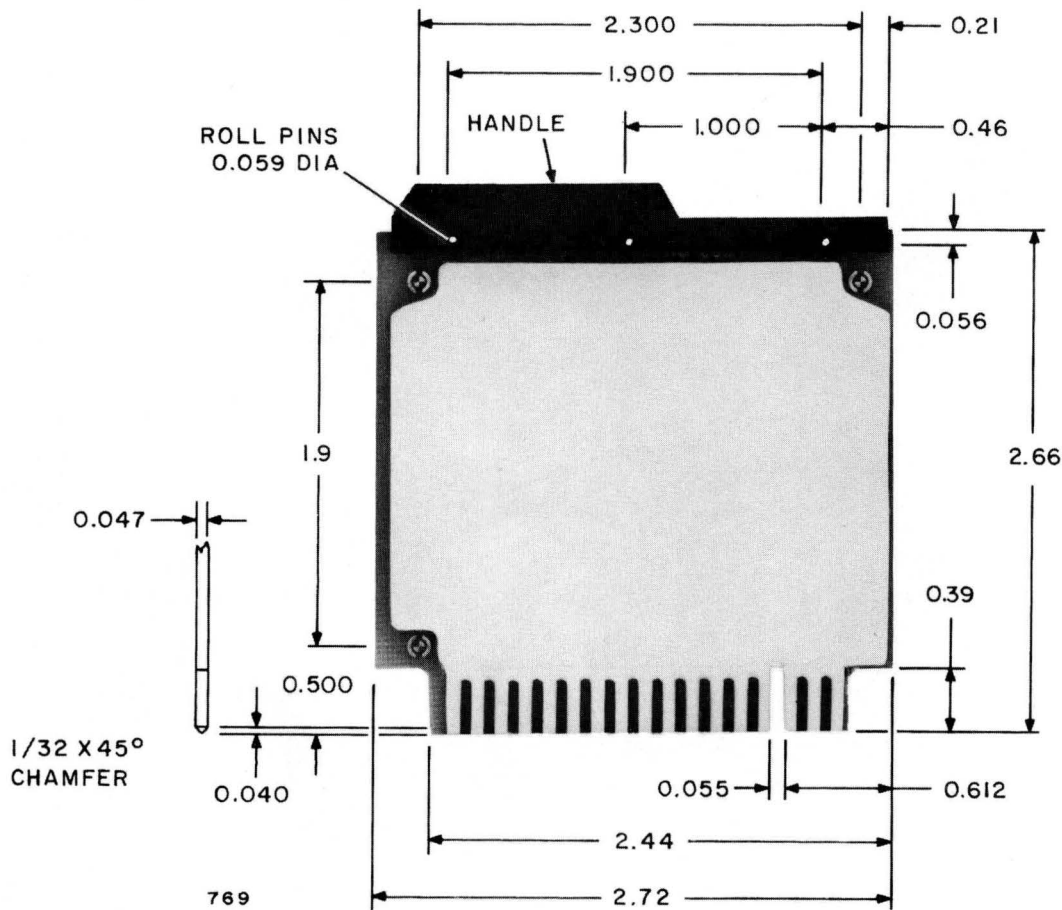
Copper Clad PAC Kit, Model AS-330, Dimensions (Etch Side View)
